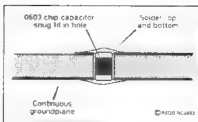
G4DCU's Technique Using an 0603 SMD Chip Capacitor mounted directly through a hole in 1.6 mm PCB
